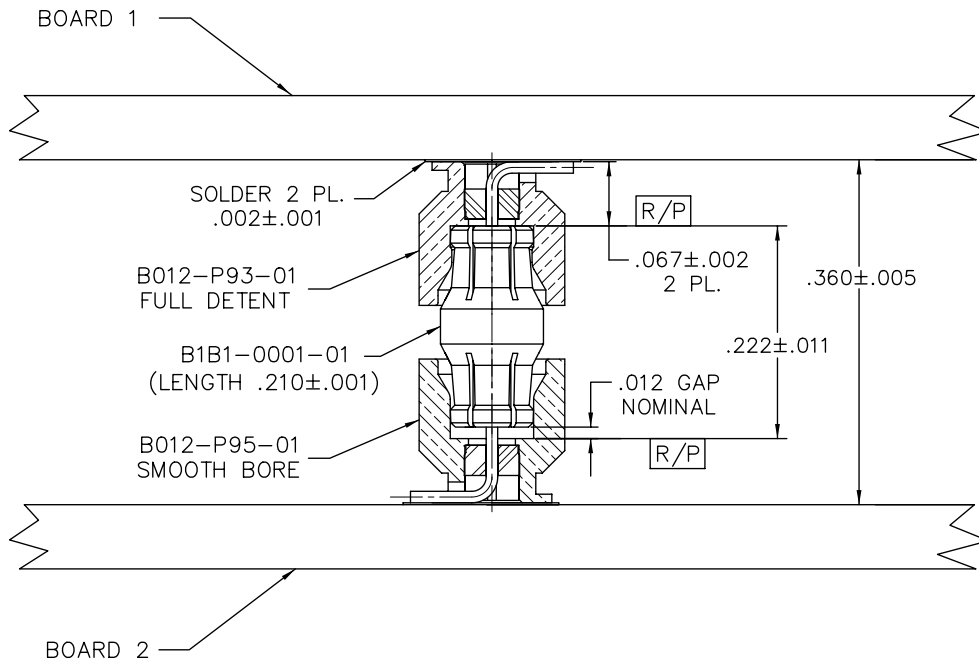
GPPO Board-to-Board Tolerance Analysis
